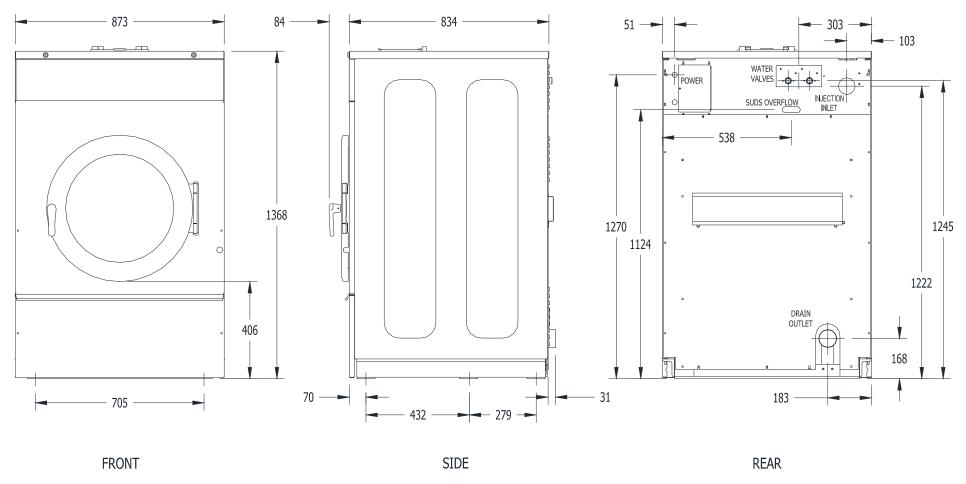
T-750 Industrial Washer Mounting Diagram
